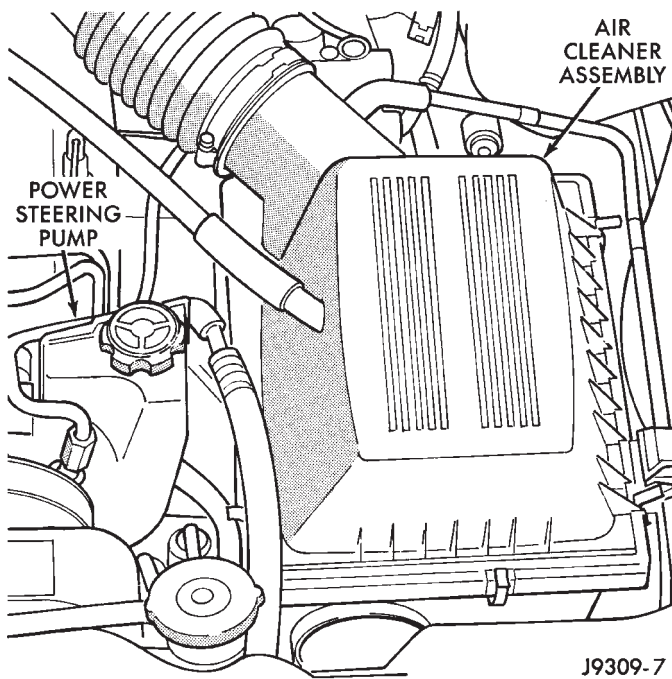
Air Cleaner Assembly & Power Steering Pump
